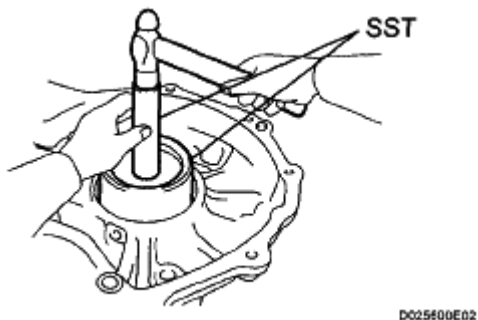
Removing Differential Side Bearing Retainer Oil SealINSPECTION1. INSPECT FRONT DIFFERENTIAL
